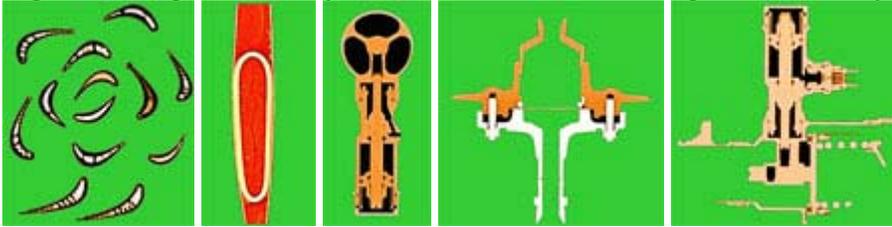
Group tomogram of 13 cooled turbine blades, tomograms of a helicopter blade and rocket valves. Tomograms of real products of electrical engineering and machine building obtained with the use of betatron MIB-5 are shown in Figs. 5-6.
